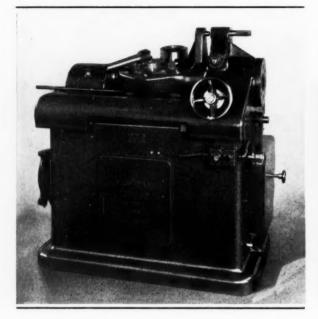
Gear-tooth "Shaving" Machine Brought out by the Michigan Tool Co. for Internal Gears
